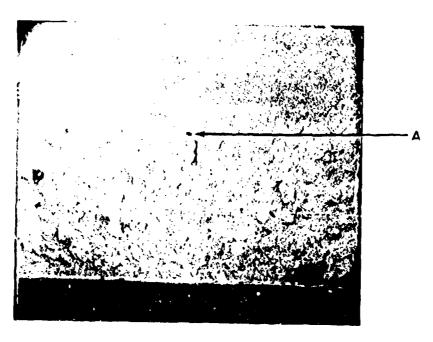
Fracture surface of an A-514 Charpy specimen tested at -196°C.
